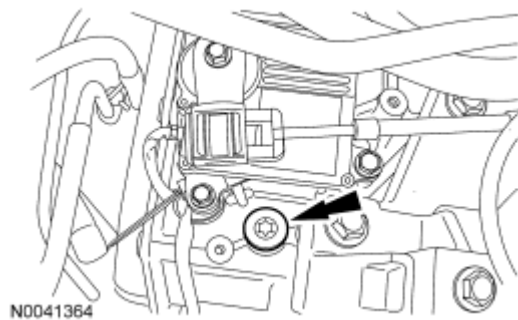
Locating Bottom Mark On Fluid Level Indicator
